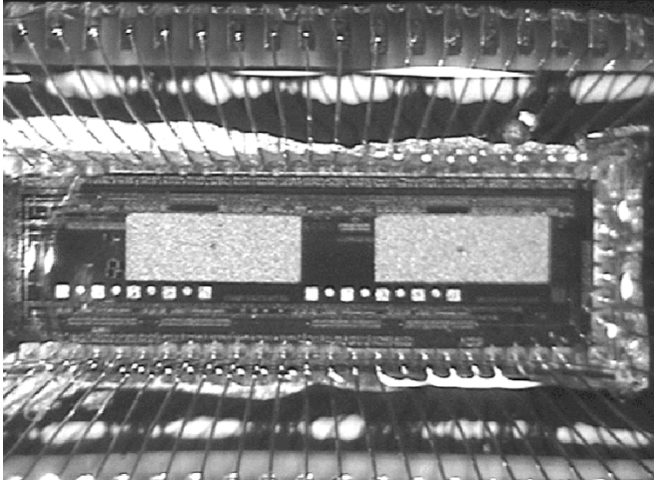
Micrograph of the chip-on-board packaging. Two photodetector arrays are attached to the transceiver chip by the flip-chip process, and the hybridized CMOS chip is wire-bonded to the carrier board.
